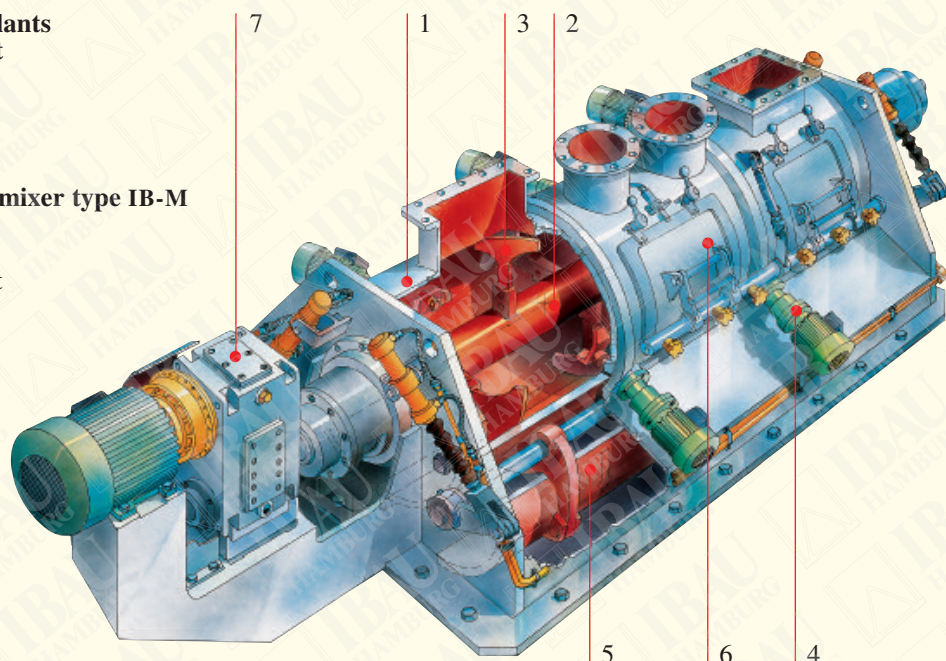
IBAU single-shaft mixer, type IB-M shown in 3D
